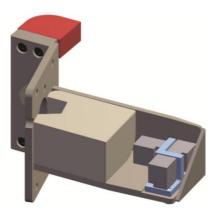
Chest accelerometer adaptor assembly
